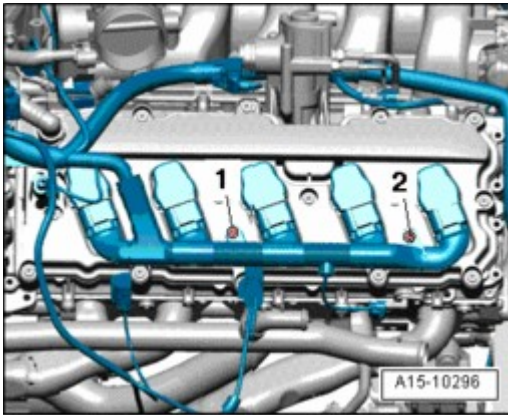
Removing Bolts & Disconnecting Electrical Connectors To Ignition Coils
